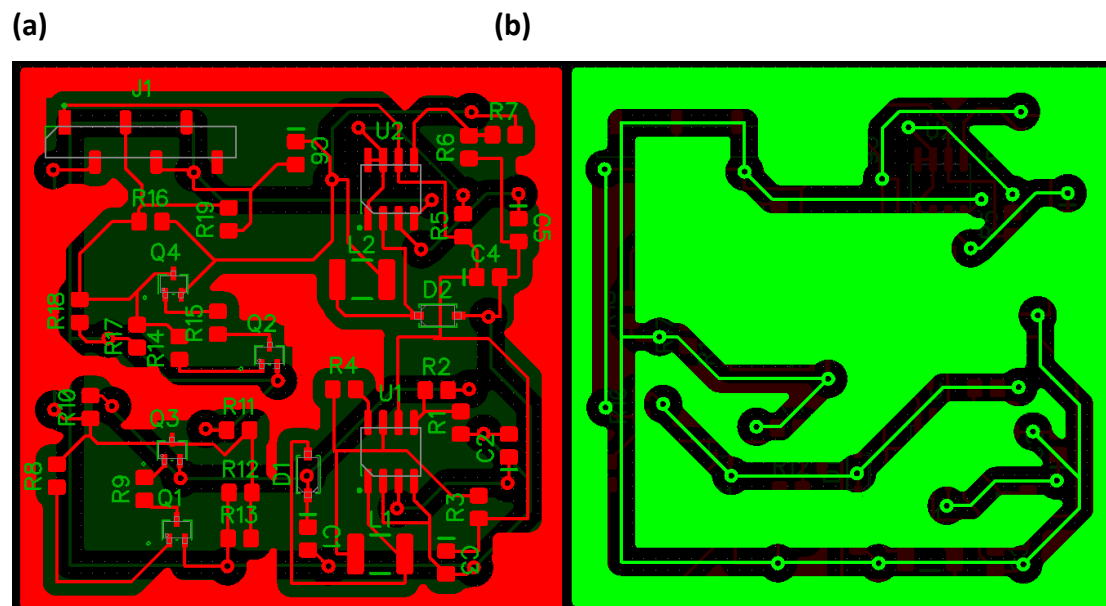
PCB Design of circuit 5 for (a) Top Side; (b) Bottom Side
